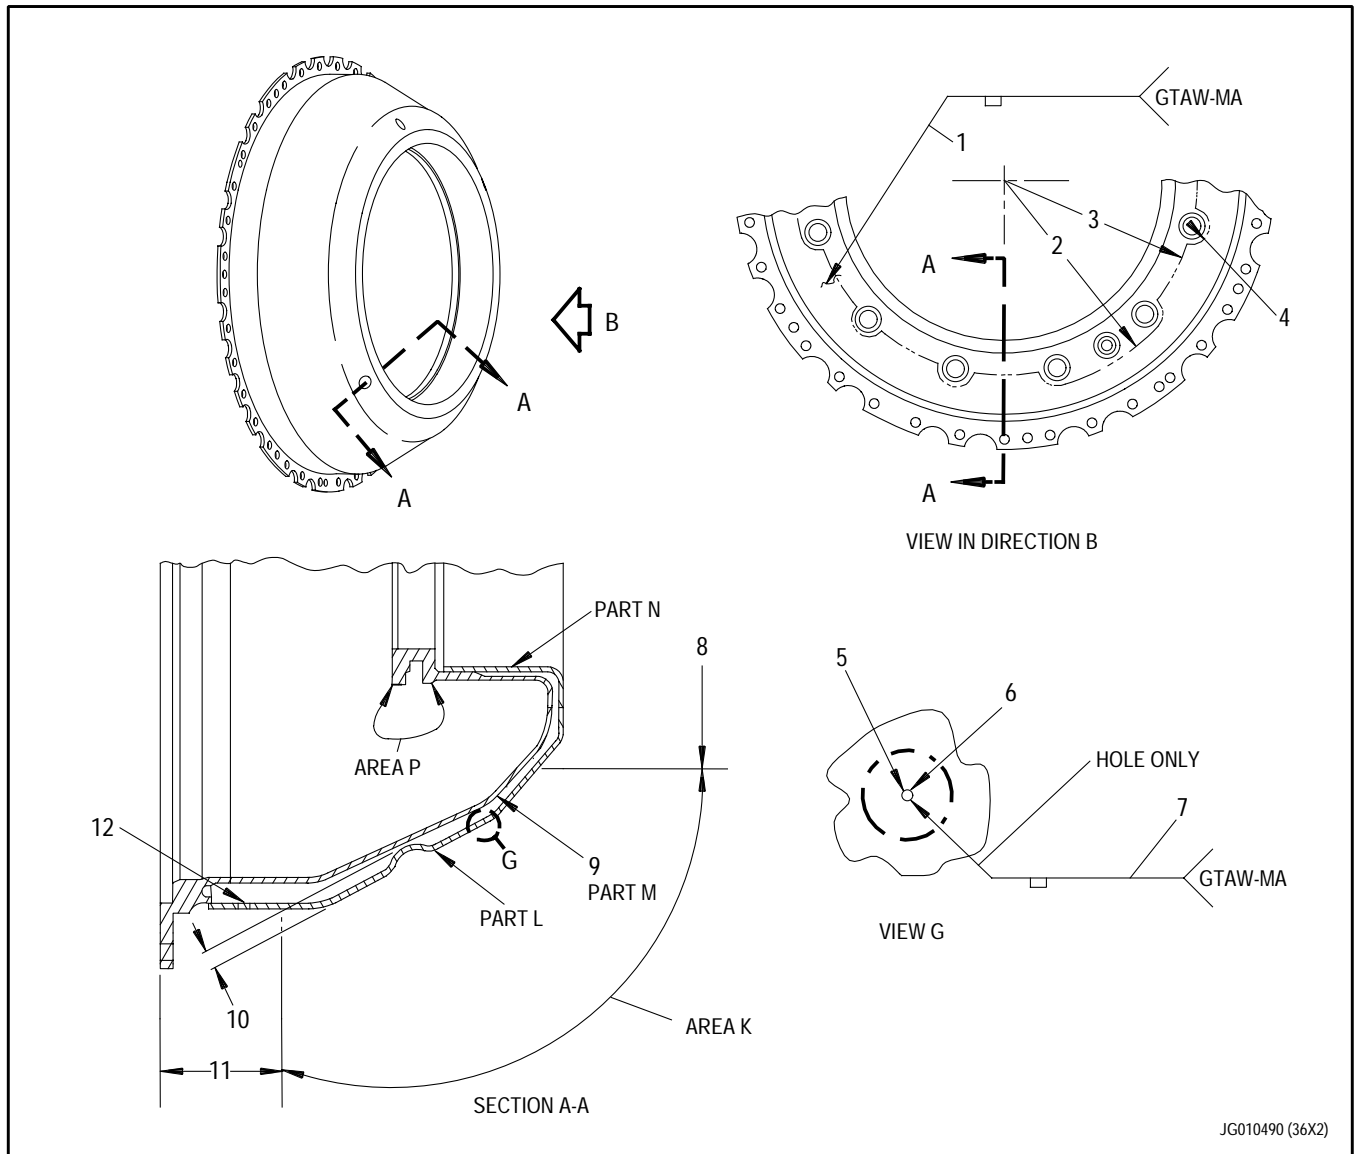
No. 4 Bearing Seal Rear Support Assembly - Weld Repair
